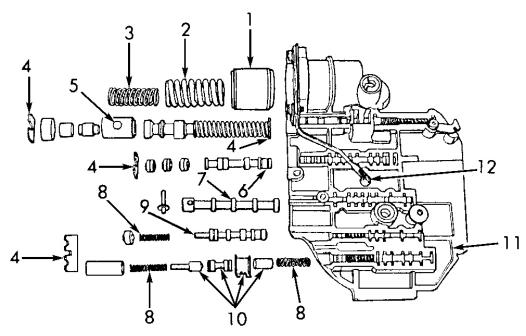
Removing & Installing Retainers In Valve Body (Step 2) Courtesy of CHRYSLER LLC
